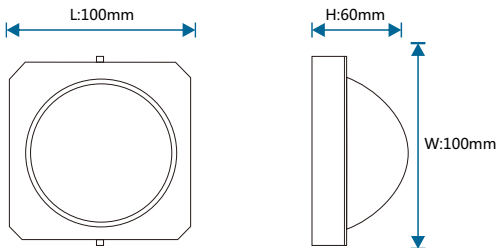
Dimensional Drawing - Front View Figure 3. Dimensional Drawing -Sideview
